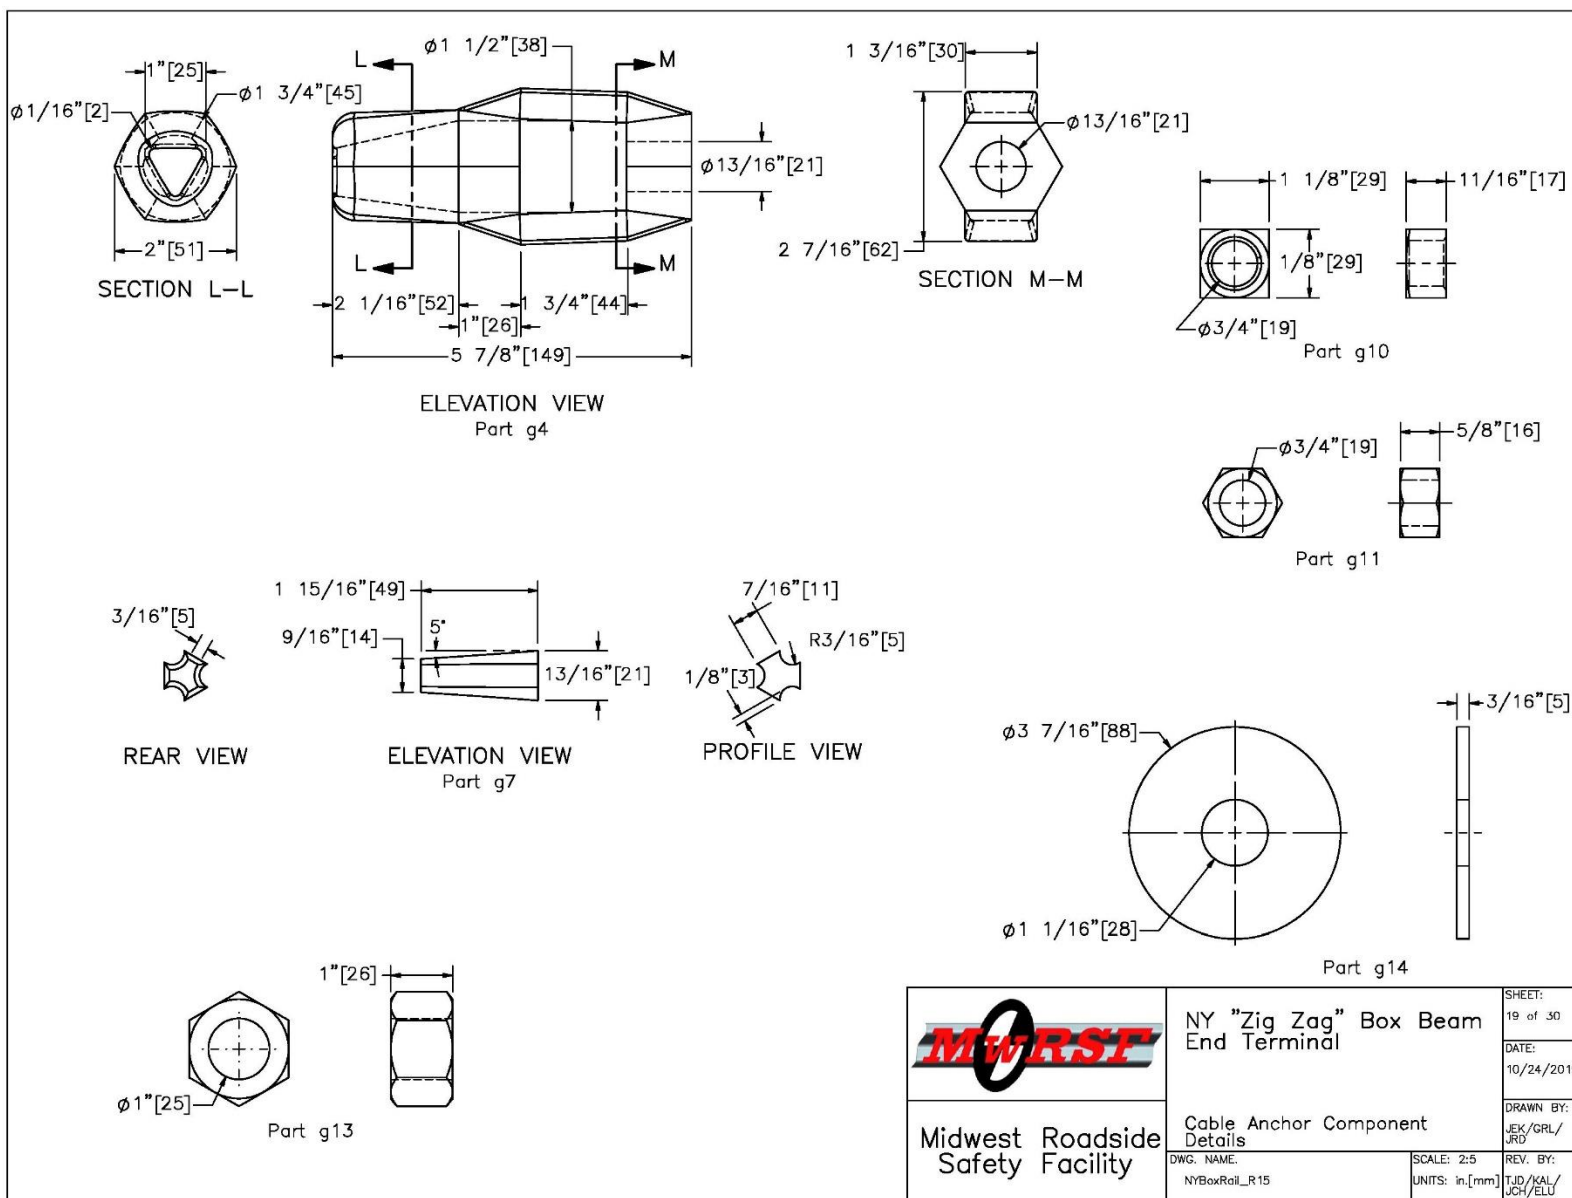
Cable Anchor Component Details, Test No. NYT-1
